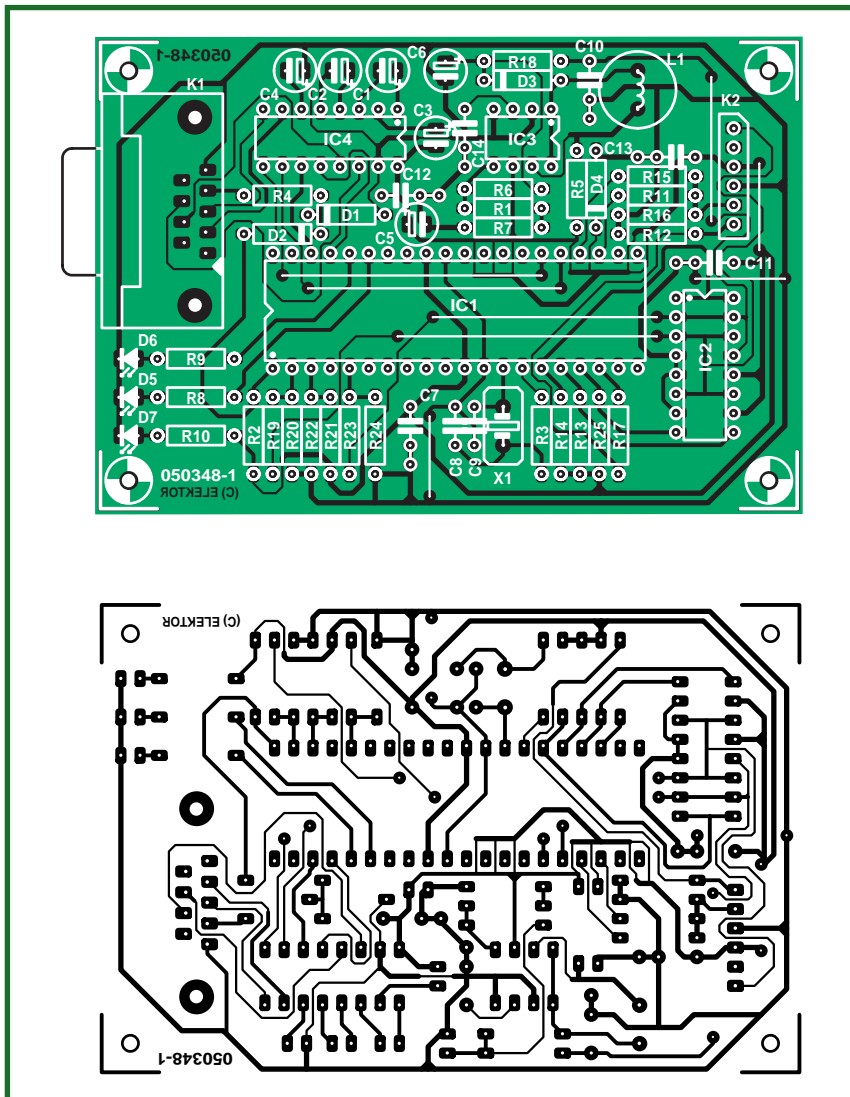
To make component placement easy the layout of the single-sided circuit board is not cramped.
